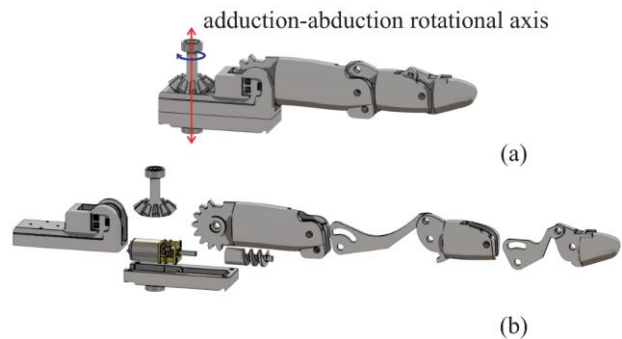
Index. (a) Assembled finger view; (b) Exploited finger view.
